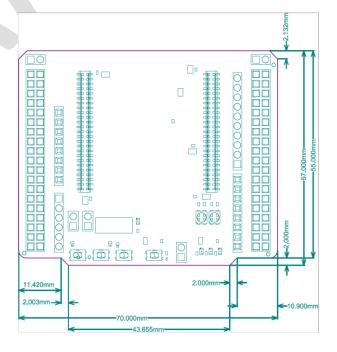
NUCLEO-WL33CC mechanical dimensions (in millimeters)
